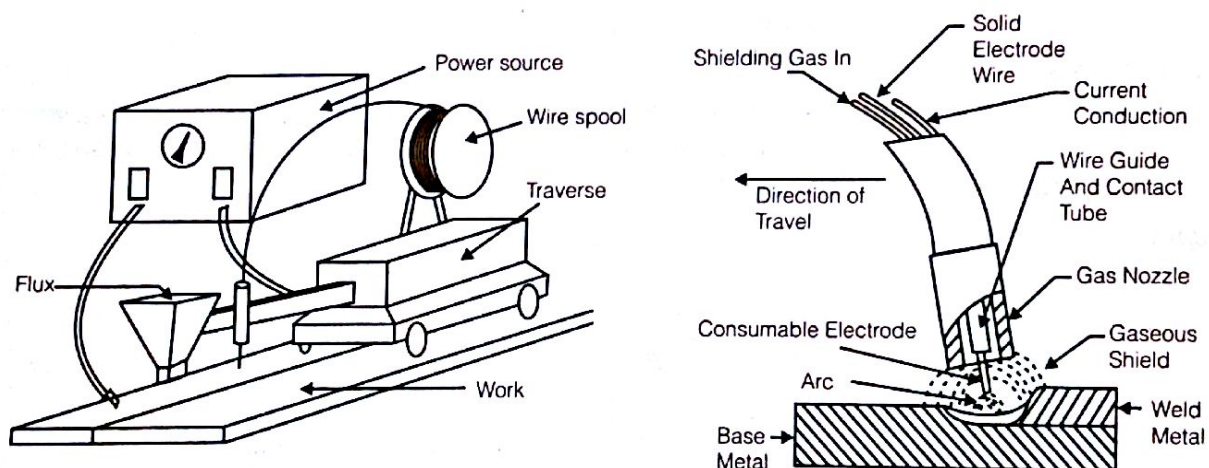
(a) and (b) Welding using SAW process
